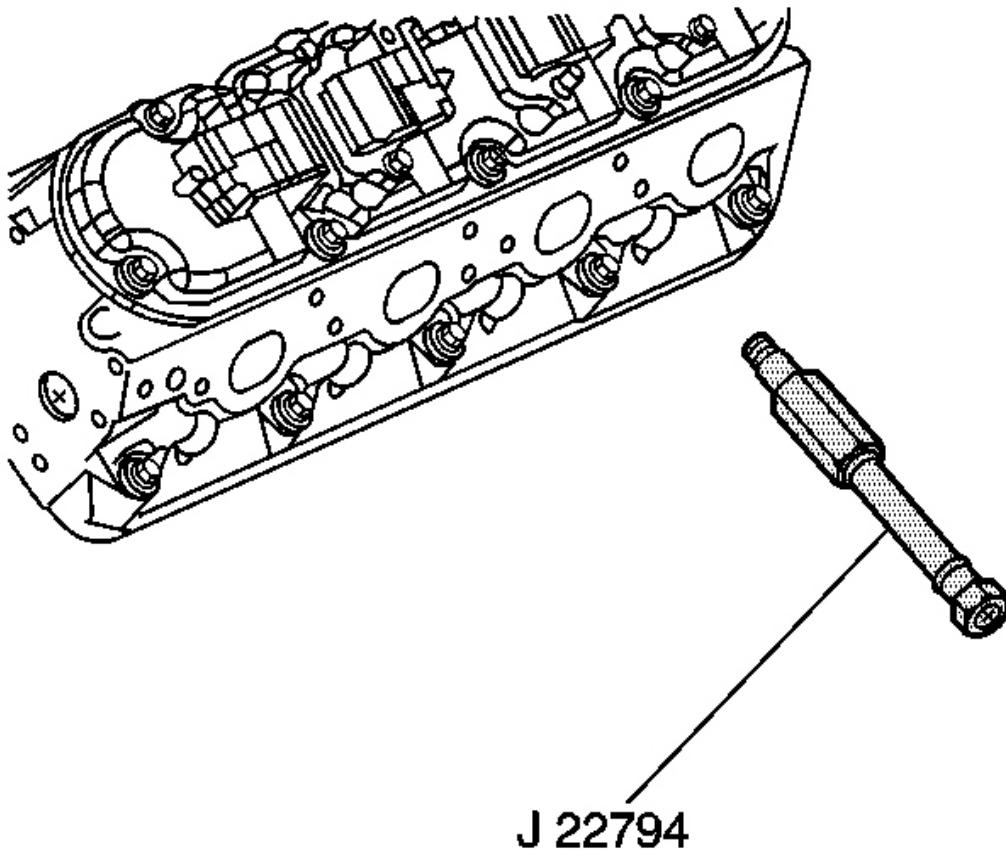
Install/Remove J 22794 Spark Plug Hole
